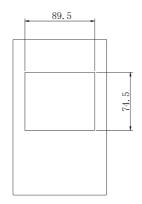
Mounting hole dimensions for operating panel base (unit: mm)
